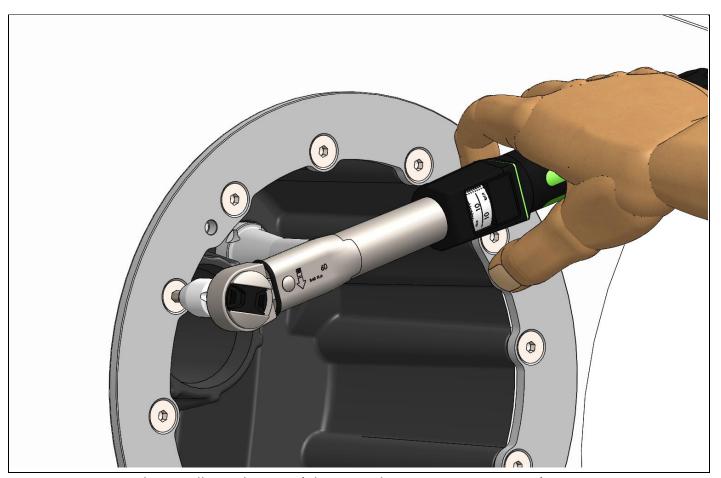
Mounting the installation housing (observe tightening torque – 15Nm)
